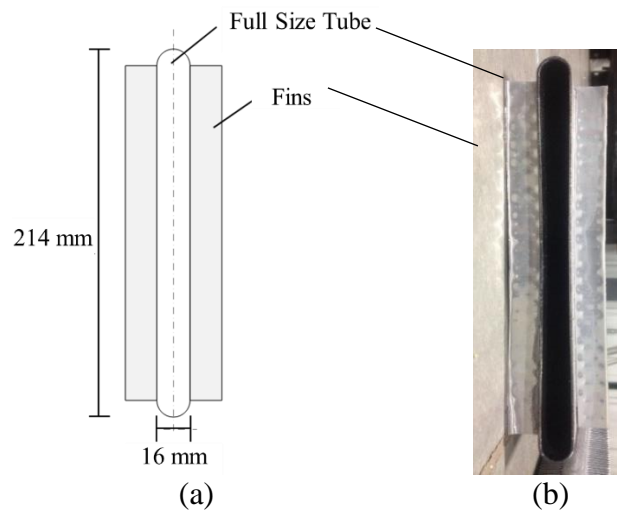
Full condenser tube cross-section view: (a) dimensioned schematic (b) actual
